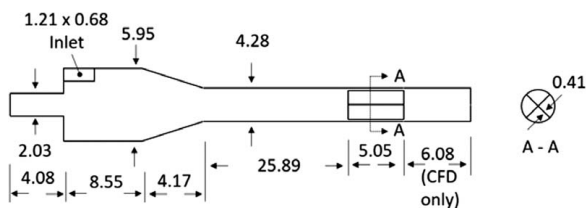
Schematic and main internal dimensions of printed vortex tube. Cruciform flow straightener shown in cross-sectional A-A. Dimensions are in millimeters.
